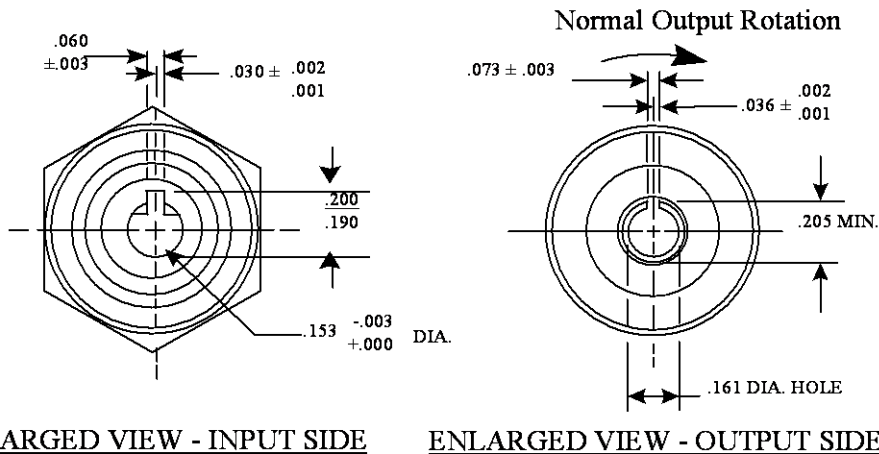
Core, flexible shaft assembly, tachometer and speedometer.
